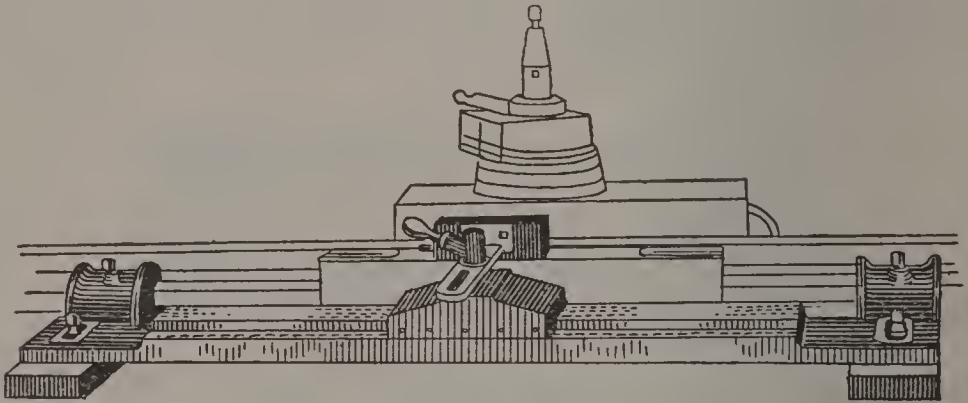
TAPER TURNING ATTACHMENT ON LATHE
